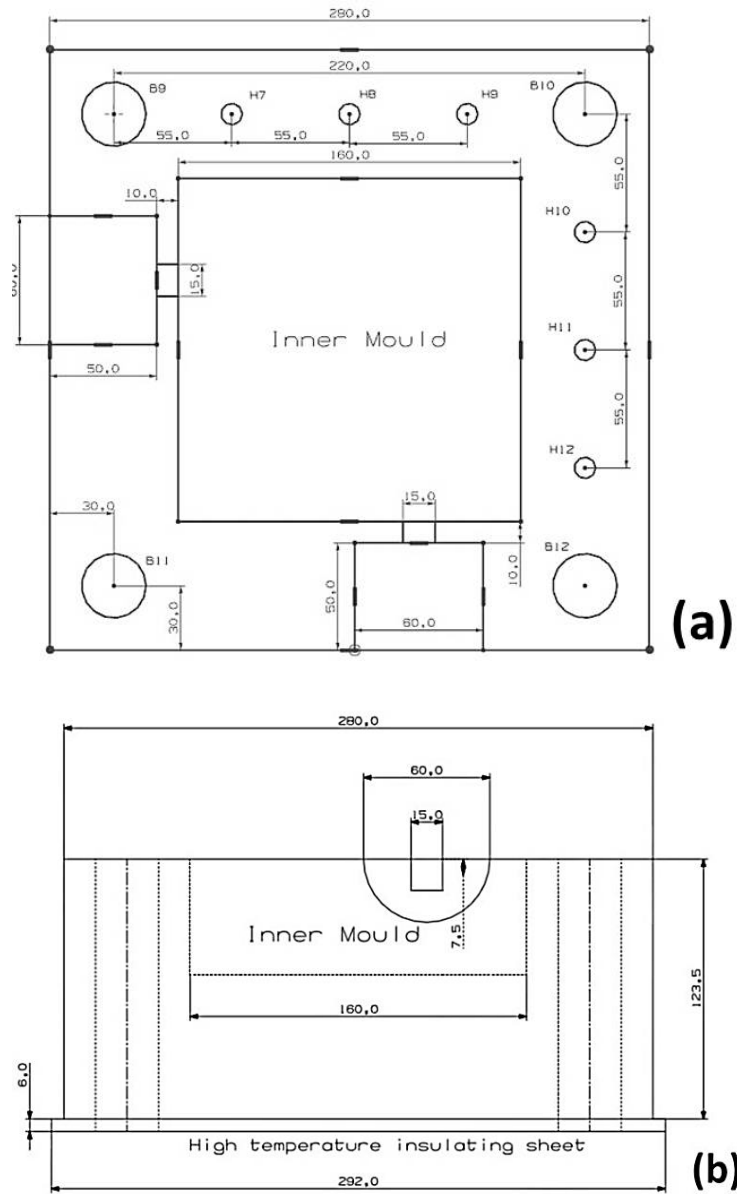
(a) The top view and (b) the front view of the die housing.
